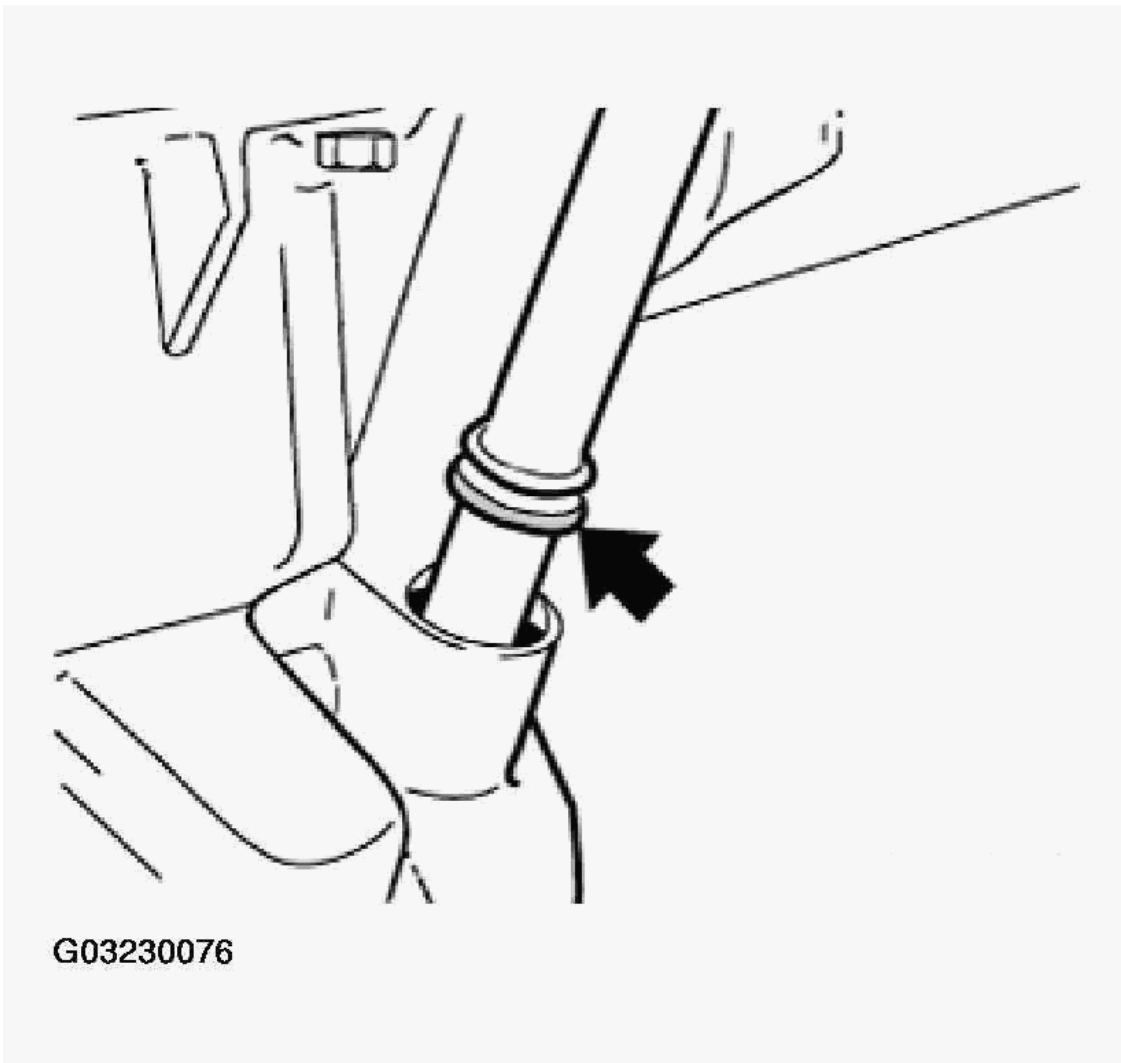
Locating O-Ring On Oil Dipstick Guide Tube
